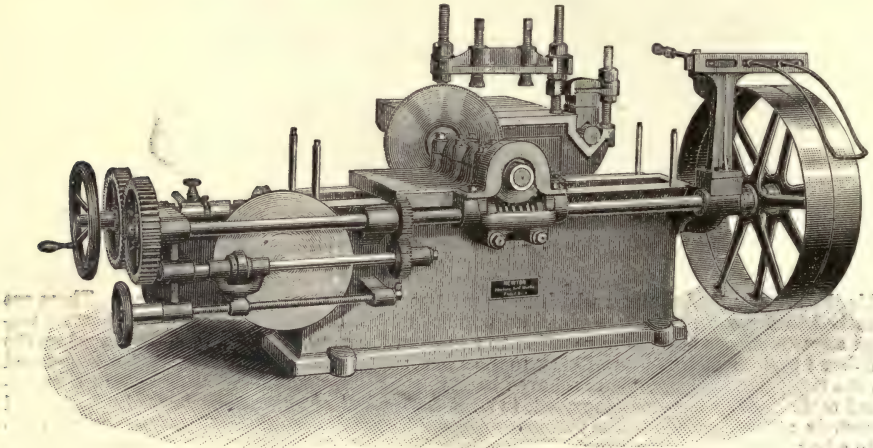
Cold saw cutting-off machine for bars and beams.
